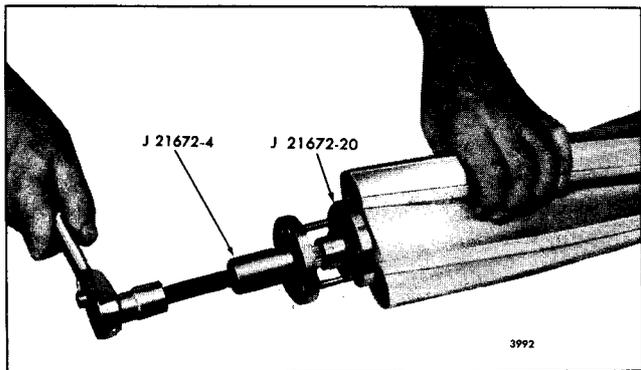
Removing Oil Seal Sleeve and Roller Bearing Inner Race from Rotor Shaft
